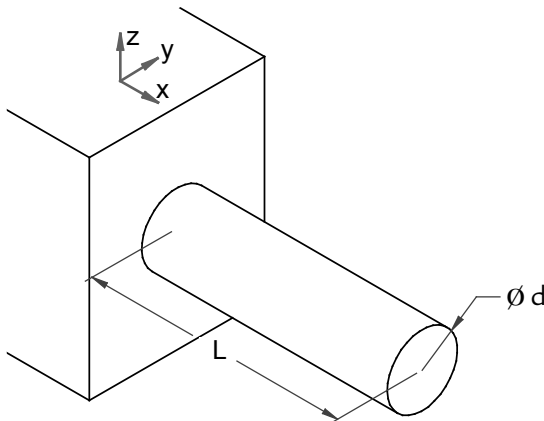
3D Cylindrical fin geometry (drawings created in Solid Edge).
